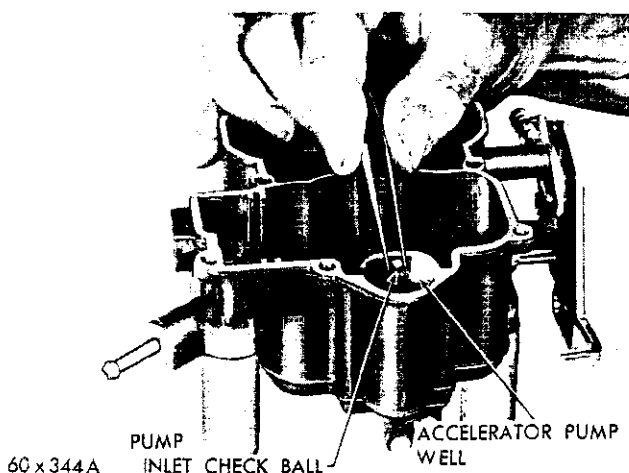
Installing the Accelerator Pump Inlet Check Ball
